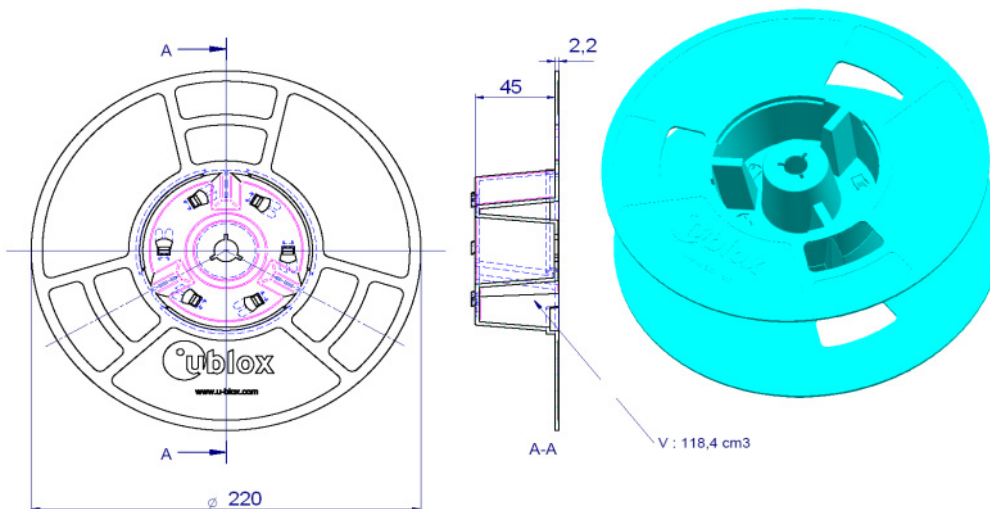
Dimension of reel for 250 pieces (dimensions unless otherwise specified in mm)
